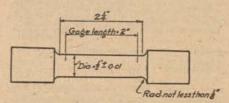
(f)—Standard round tension-test specimen with 2-inch gauge length.
